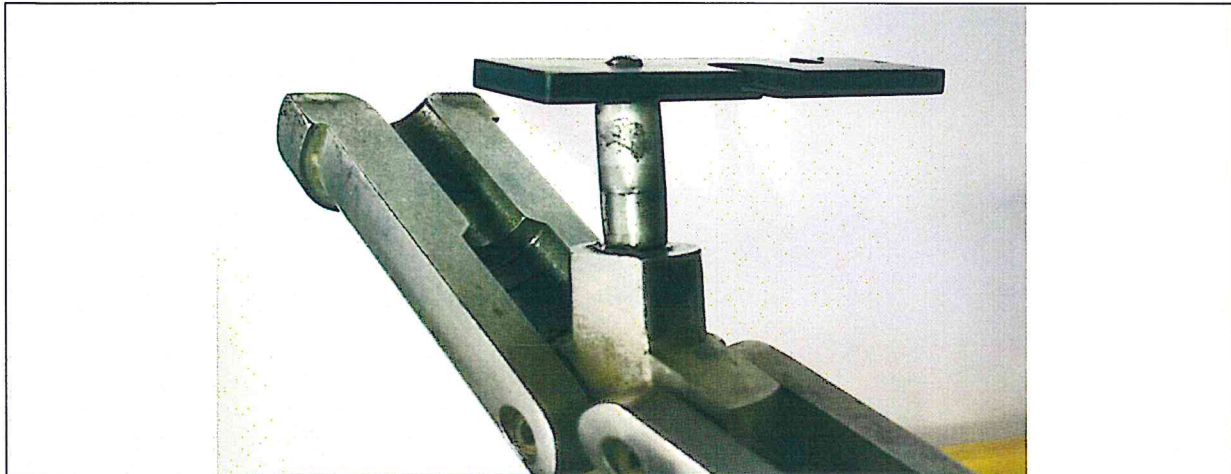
NO-GO gauge test FAILURE indicating excessive wear on drive cable connector ball diameter
